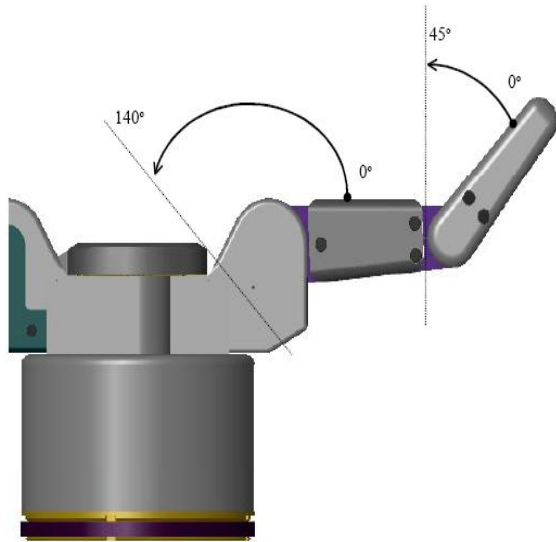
The inner and outer joints close in a 3-to-4 ratio with respect to the robot toolplate until the inner link strikes an obstacle, activating the TorqueSwitch
